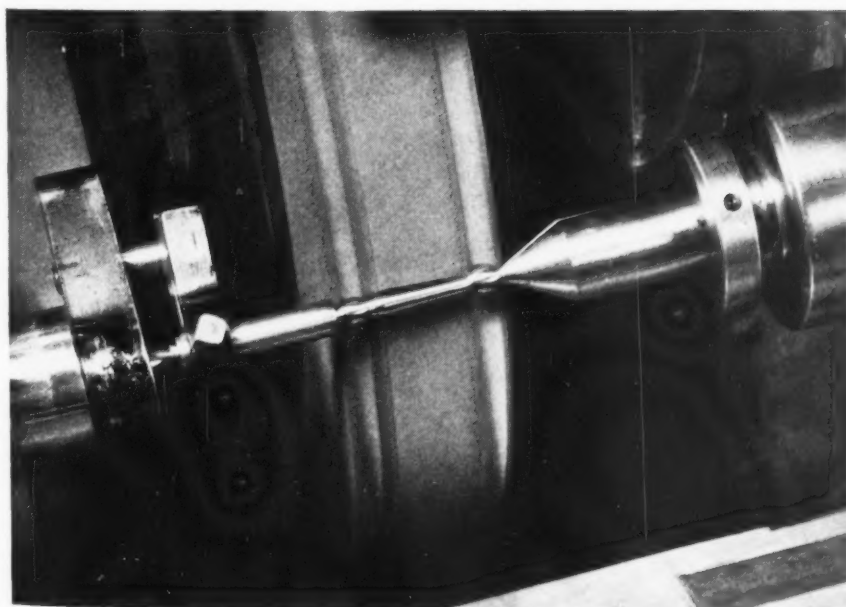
(Below) Using a Thread-grinding Machine for Form Grinding. In the View at the Right May be Seen the Wheel Dresser and the Completed Work
